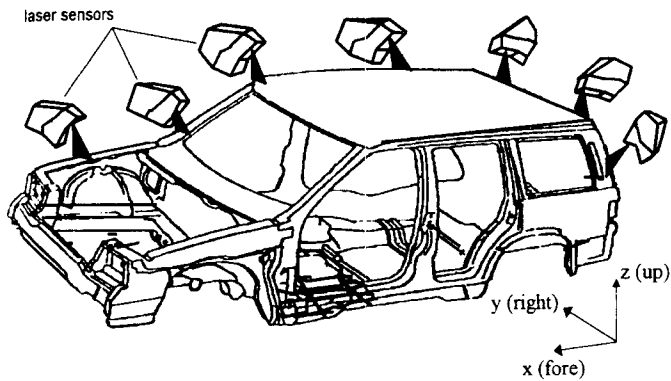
Laser Sensing at the BIW Stage in Autobody Assembly.
